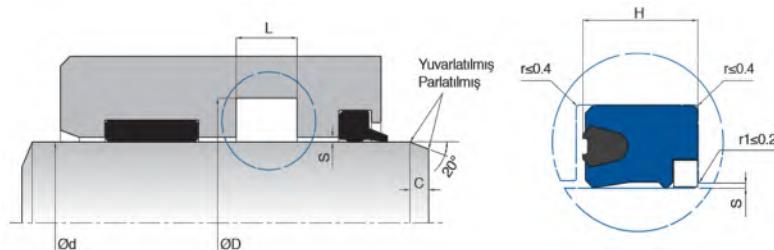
Design suggestion for K31 Heavy duty rod seal from Kastaş A.Ş. [22].
